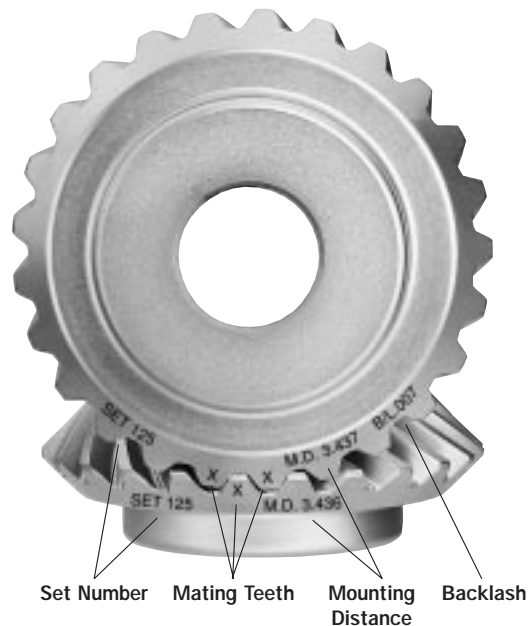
All Arrow Stock Gears are marked with the above assembly information.
